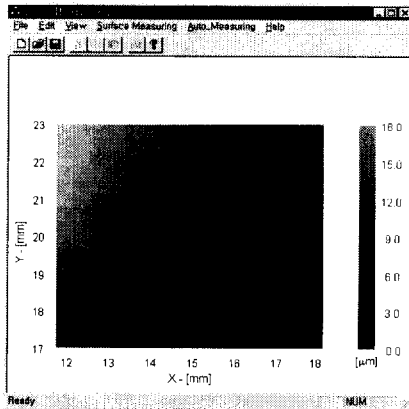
On-the-machine measurement result I : Inspection model and machining error map
